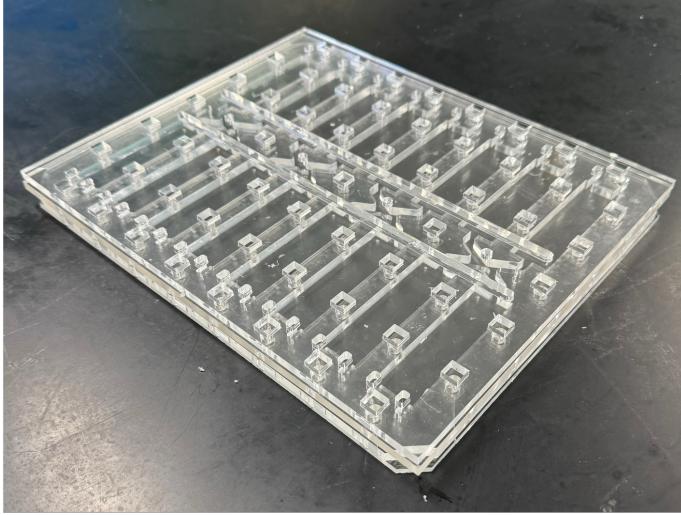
Pieces of laser cut acrylic stacked atop one another to form a complete mold shape. This custom mold helps in the manufacturing of 16 blocks of chosen material, which can be bonded together for use in peel test.
